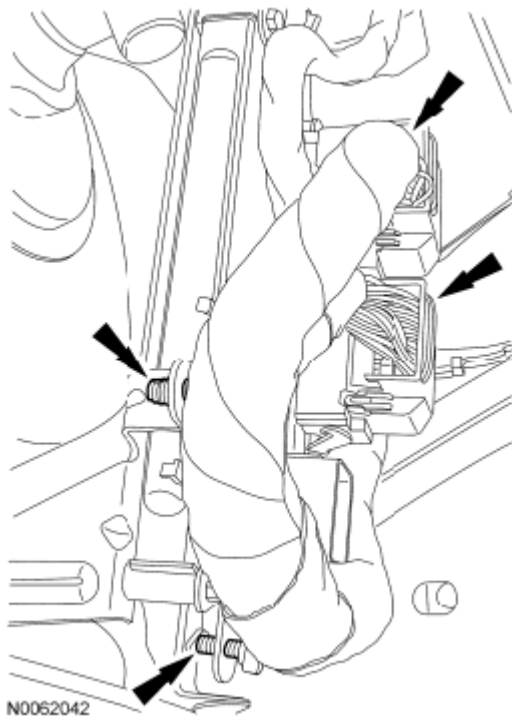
Locating PCM Electrical Connectors & Pin-Type Retainers
